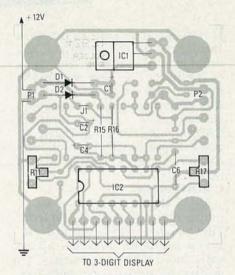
VOLTAGE GAUGE parts placement. Solder the parts to the board in smallest-to-largest order, clipping and saving the leads.
